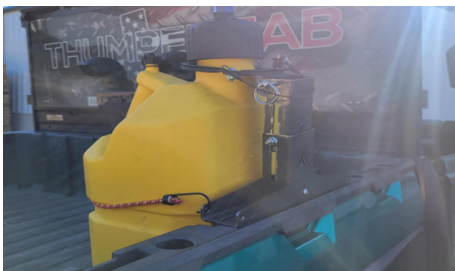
Mount Jug Mount assembly using 1/2" Socket. Fasten jug to assembly using Bungee Cord (I)
